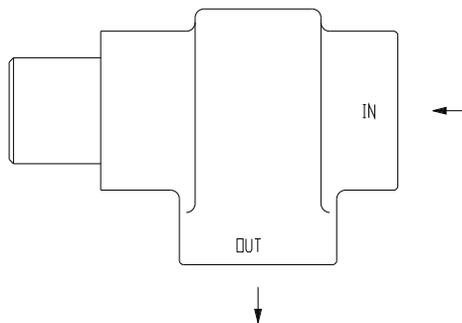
MINIMUM PRESSURE/CHECK VALVE
